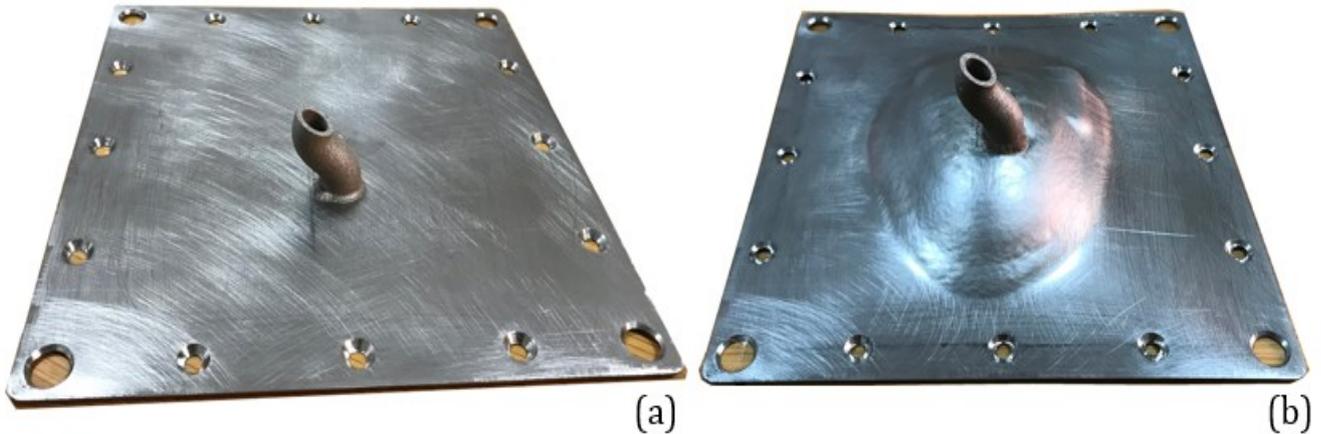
(a) the undeformed sheet with the 3D protrusion made by SLS and (b) the final component made by the investigated hybrid approach.
